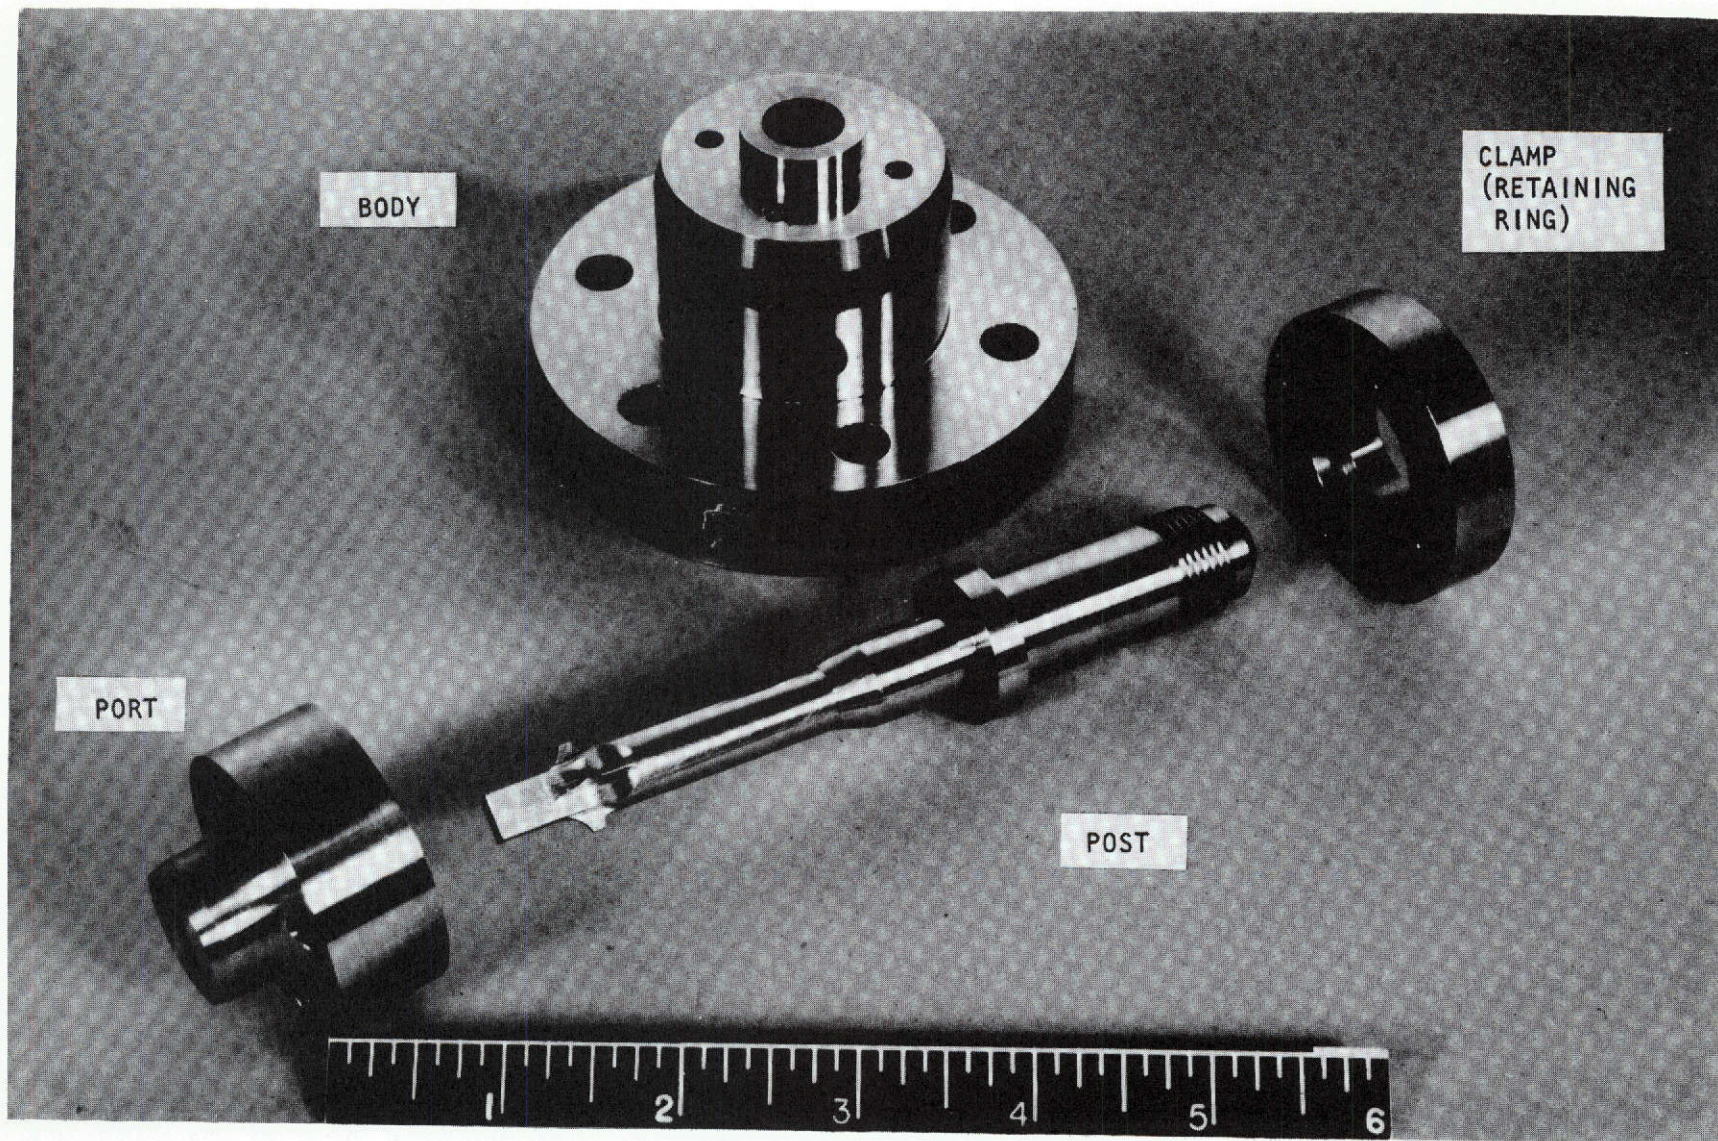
Single-Element Injector Assembly--Element GCR-5 Shown
